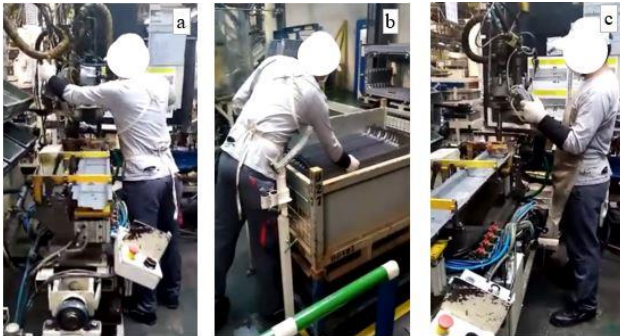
Manual welding line with balancer gun. (a) manual welding with balancer, (b) putting the part to the pallet, (c) welding in pneumatic jig.
